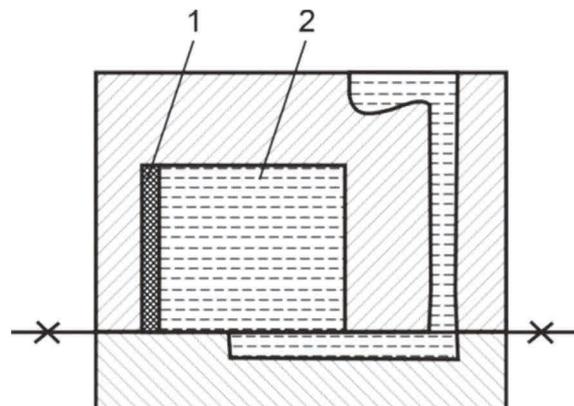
Forming of surface composite layers - foundry method; 1 - composite pre mould; 2 - liquid metal
